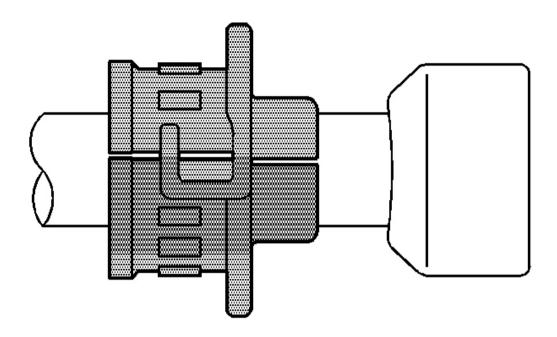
TOC Connection & J 44827 Courtesy of GENERAL MOTORS CORP.
